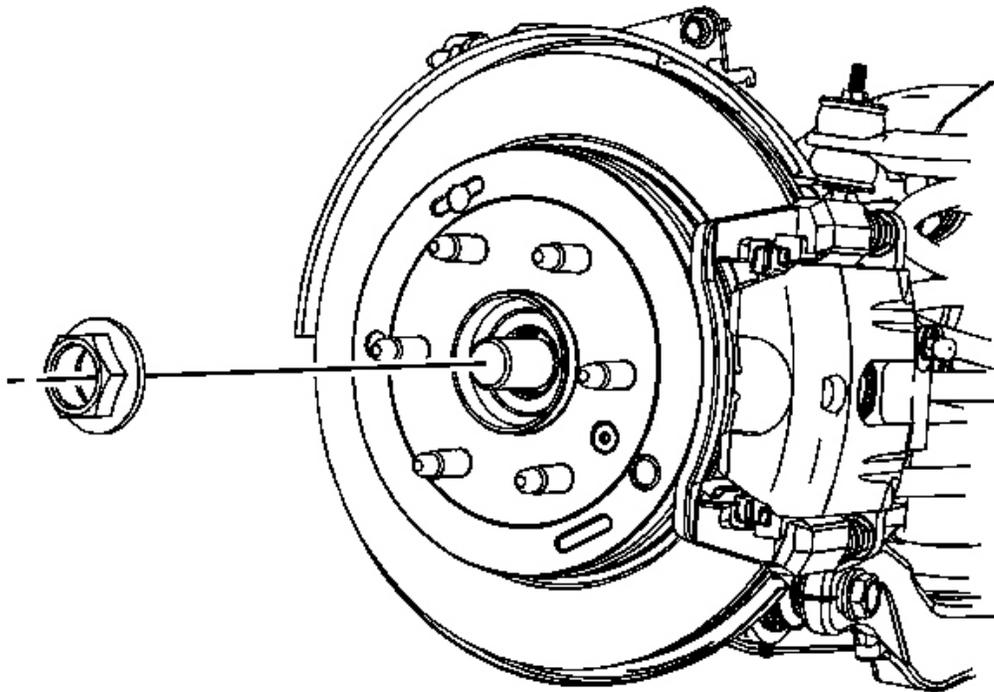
View Of Tightening/Loosening The Wheel Drive Shaft Nut
